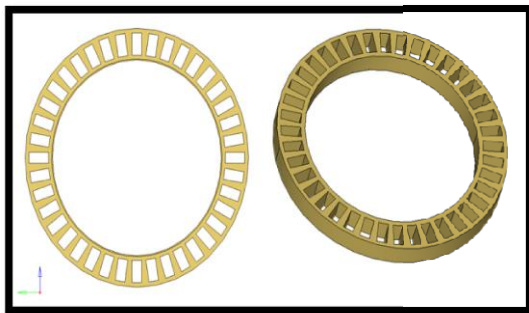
CAD Detail of Swirler Configuration-A with Inclined Passage
